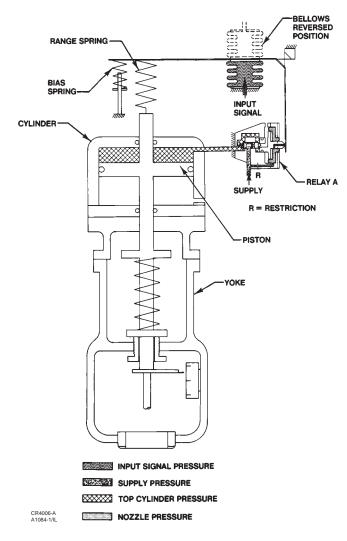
Schematic Diagram of Type 3572 Positioner with a Type 472 Pneumatic Piston Actuator
